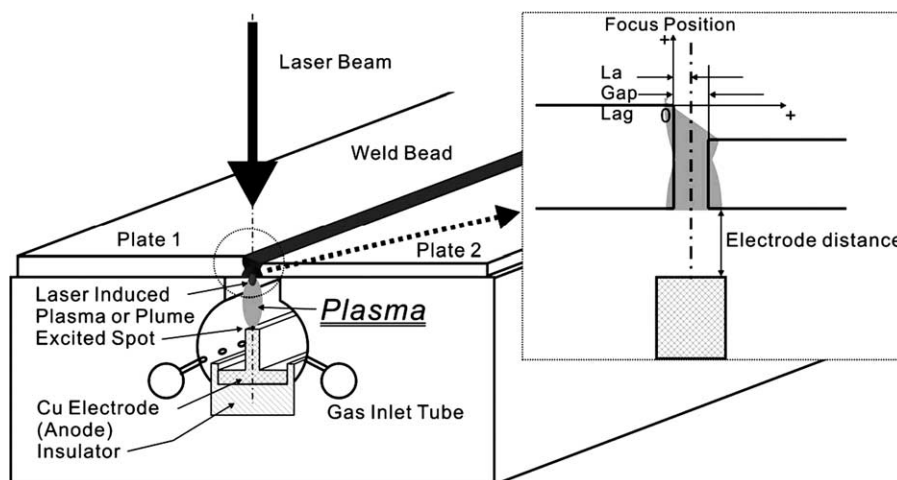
Schematic experimental configuration for method of laser welding with an applied electrical potential for butt joint welding; during laser welding, electrical potential is applied between plates and copper electrode with injection of argon, helium, or hydrogen plasma gas.
